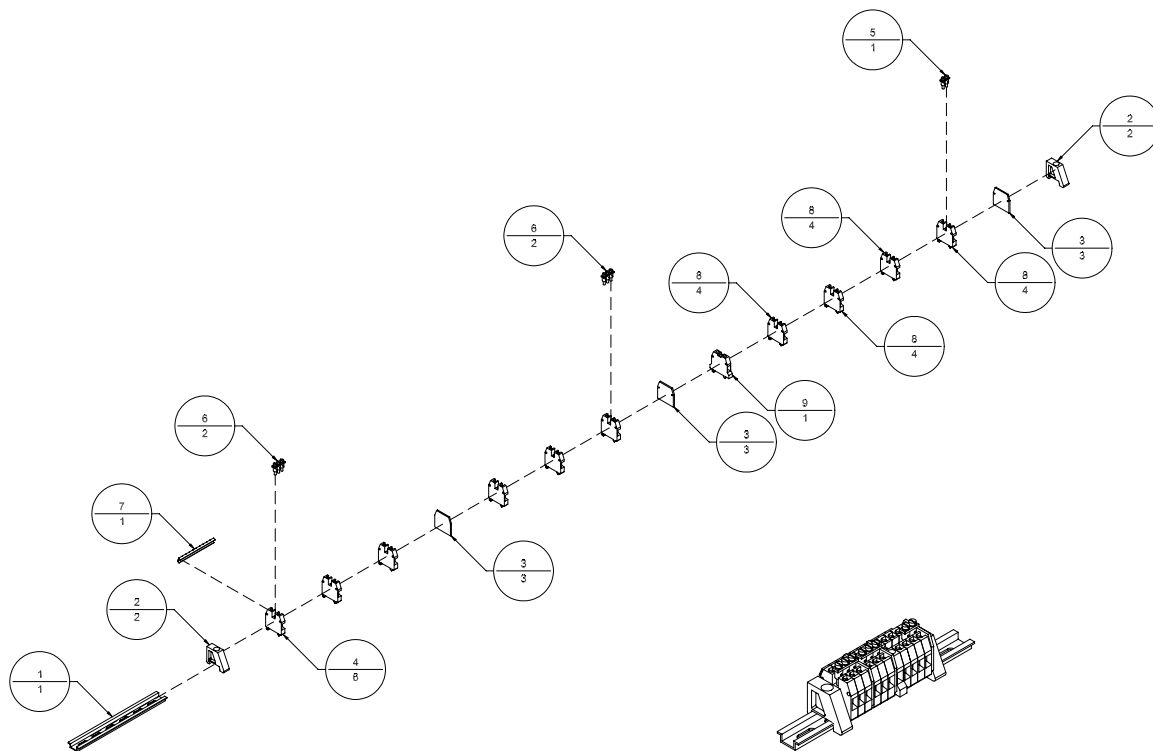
Suspension Base Block Assembly (9101565A)
